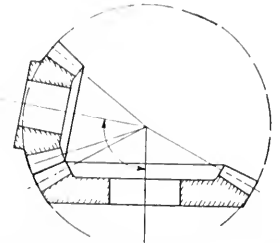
BRINGING THE FACES PARALLEL AS THE GEARS ENTER CONTACT
